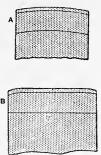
Rounded Edge of Smoothing Plane Cutter (A) and Jack Plane Cutter (B)
